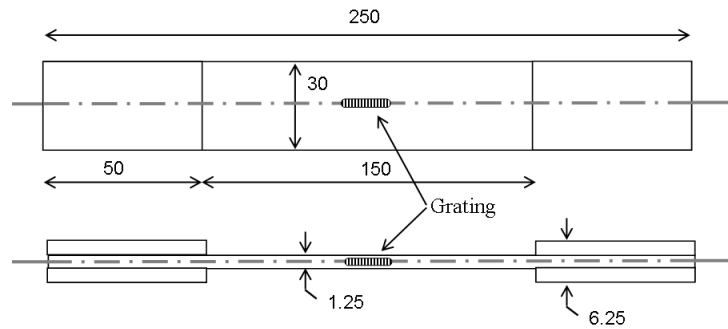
Dimensions of the used tensile coupon, equipped with tabs.
